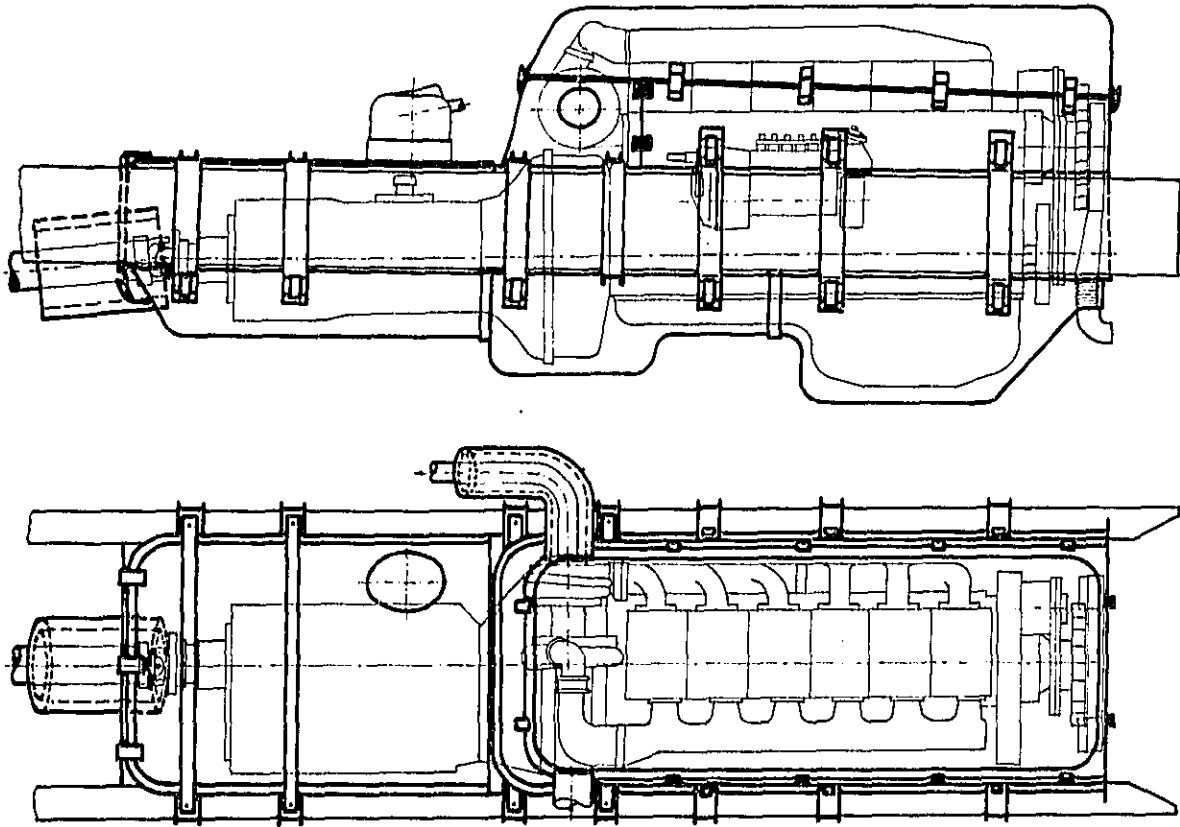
Design of a chassis mounted noise - reducing capsule of engine and gearbox
